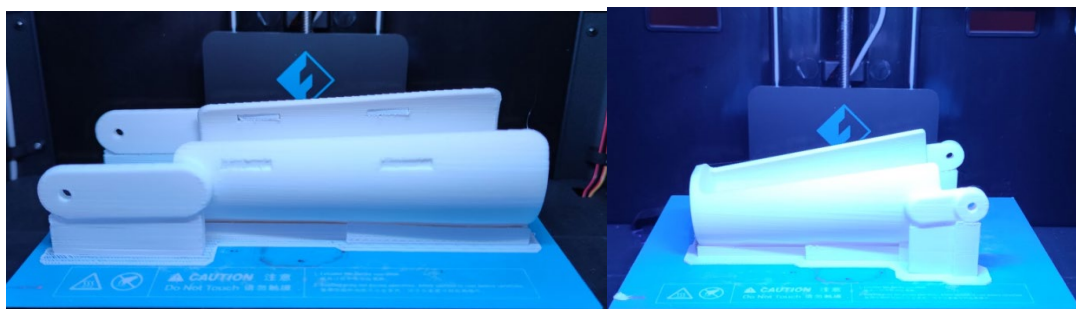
Parts of prosthesis (socket and forearm) made using FlashForge Creator Pro machines
